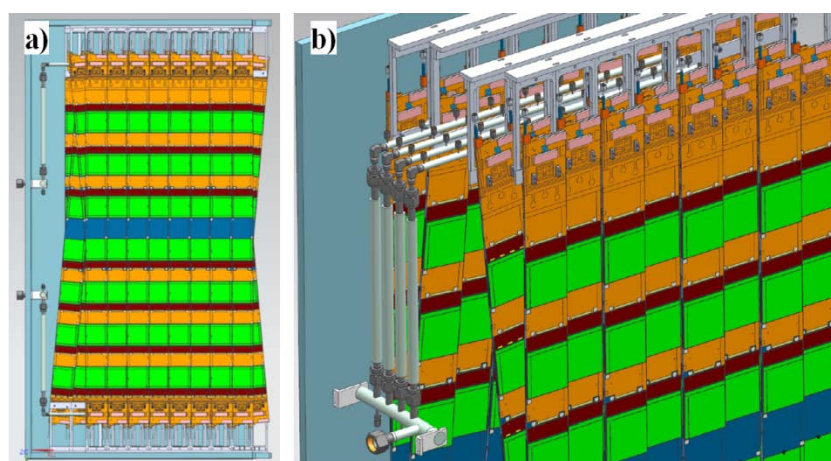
a) Cooling manifolds going outside the box; b) Single pipe supply for 4 manifolds [33]
